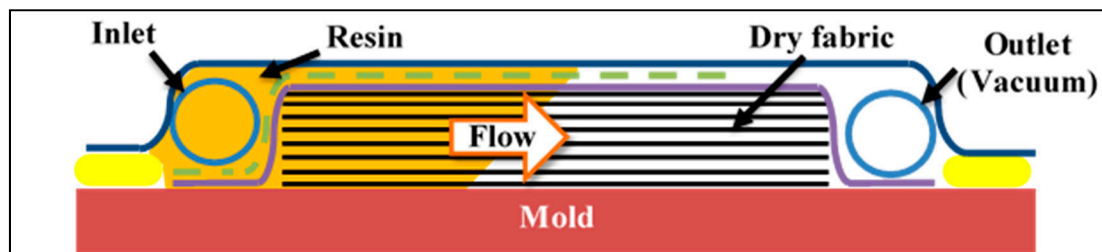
Schema of vacuum assisted resin transfer molding (VARTM) process.
